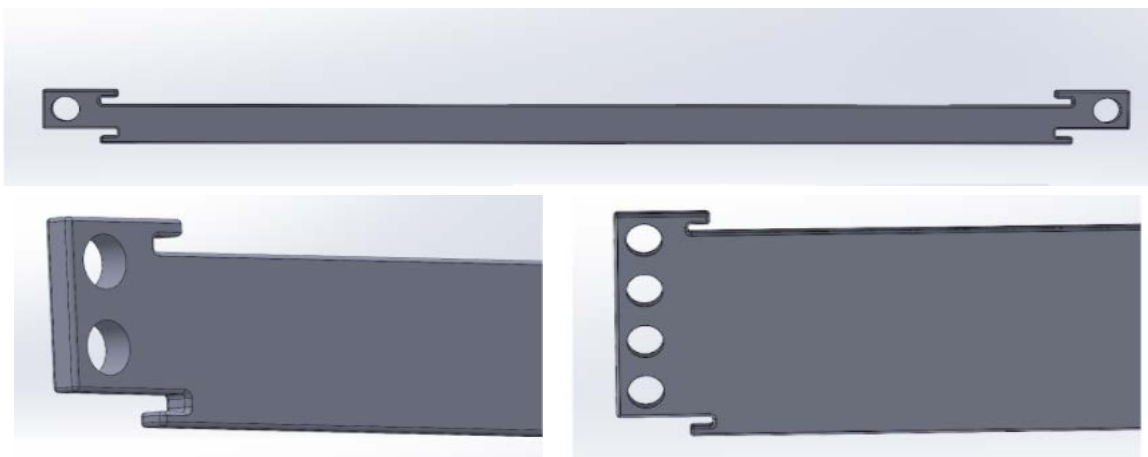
SOLIDWORKS 3D Design of a 1cm, 2 cm, and 4 cm aluminum rectangular piece.
